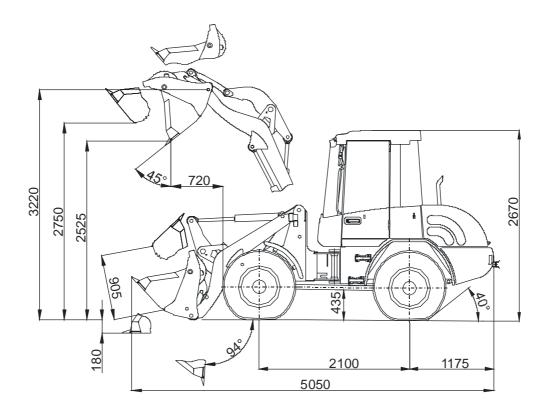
Dimensioned drawing with general-purpose bucket and Z-bar linkage 405/70 R18 tires
